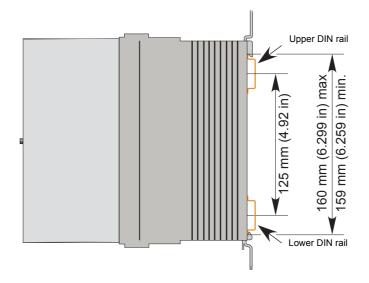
DIN rail mounting details for 80A, 100A and 125A units
